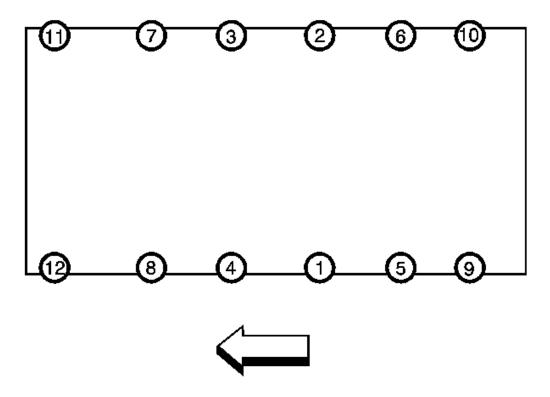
View Of Oil Pan Bolt Tightening Sequence Courtesy of GENERAL MOTORS CORP.
